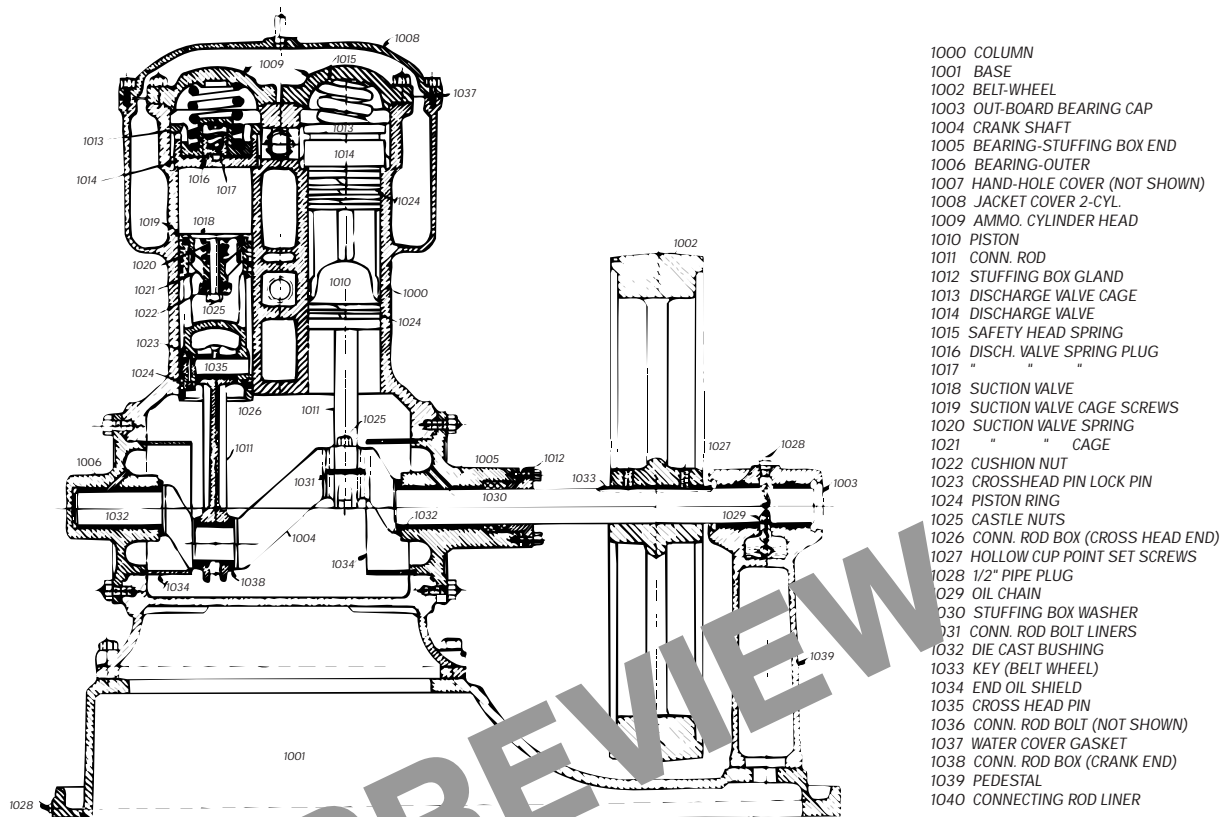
Sectional view of Frick enclosed two-cylinder compressor
